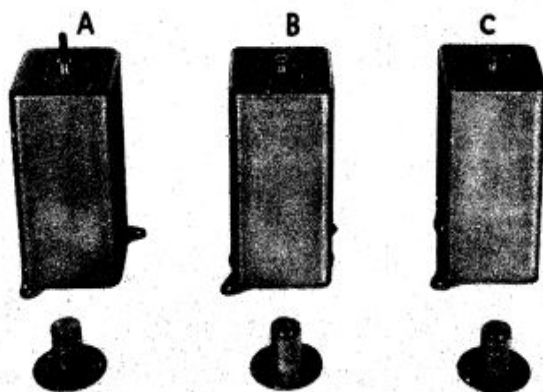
TYPICAL IF COUPLING UNIT ASSEMBLIES
